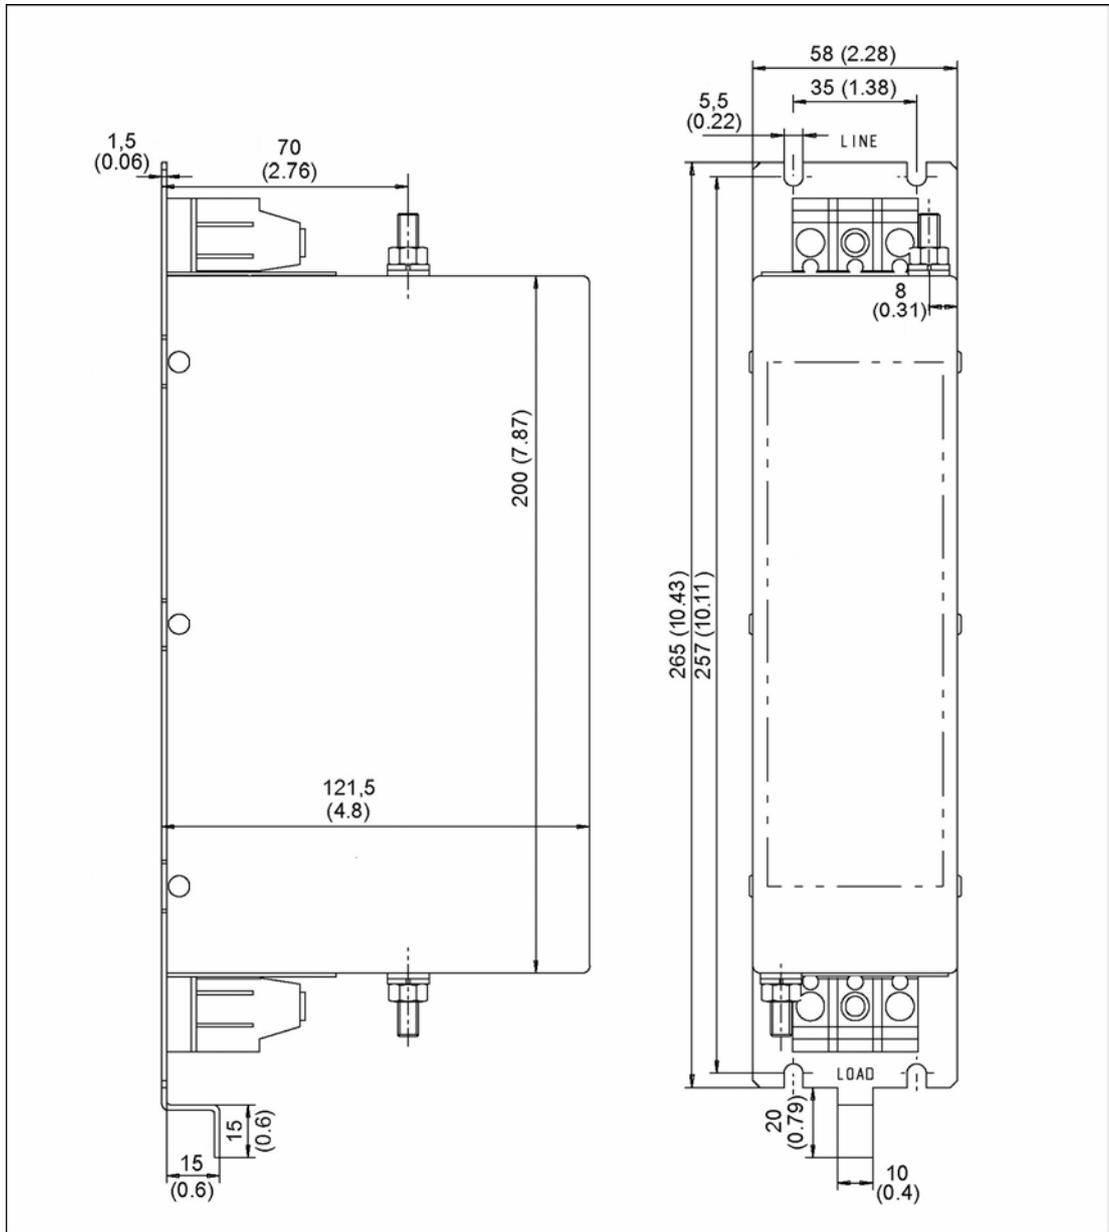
Dimension drawing: Basic Line Filter for Smart Line Modules (5 and 10 kW)
